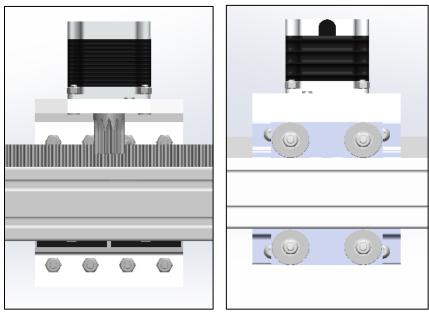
(left) & 20b(right)- Model of pinion motor assembly mounted on one 2000 m run of rack (left); a model of an idler assembly rolling on the 20' piece of 80/20 (right).
